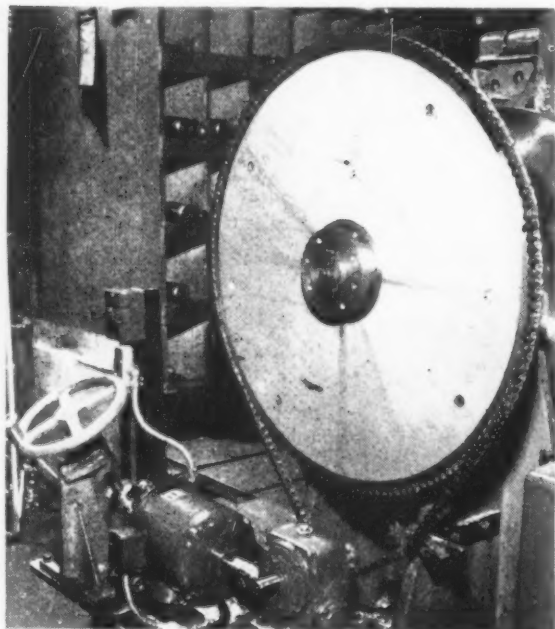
Indexing sprockets are used on trunnioned fixtures for transmission castings. Either the motor or the hand wheel can be used to turn the small drive sprocket on the output shaft of a worm reducer.
